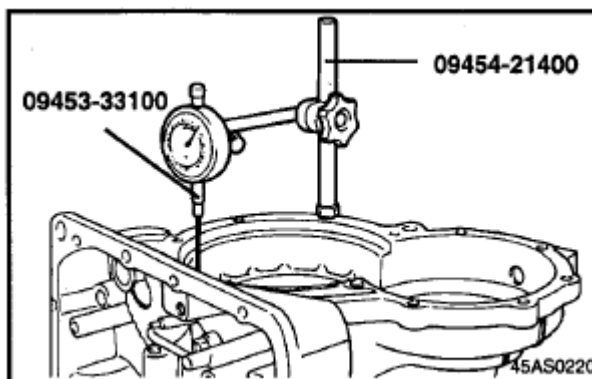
Installing Special Tools & Dial Gauge At Rear Side Of Transaxle Case
